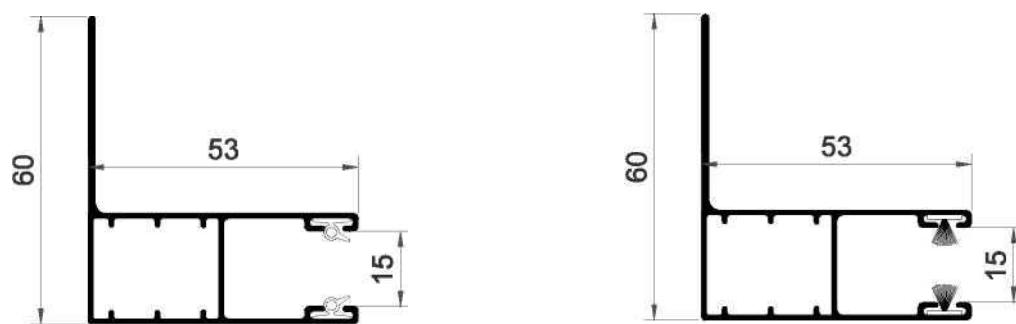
Cross-section side guide (PK53), with a bottom slat or brush seal
